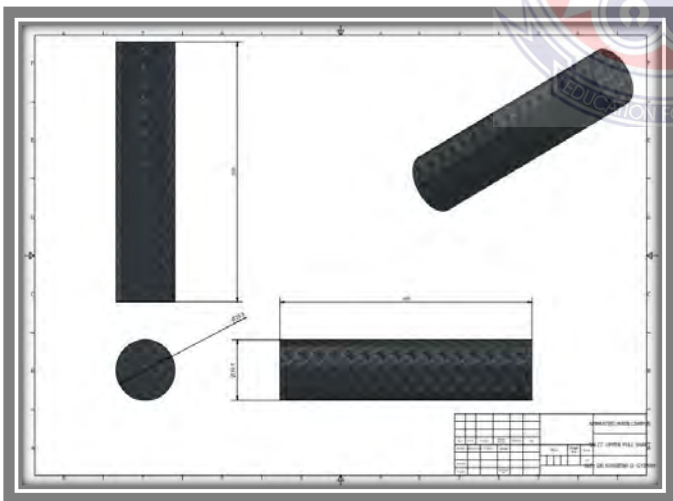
, SN 27: Upper Top Pull Shaft (Upper Link Mechanism)
